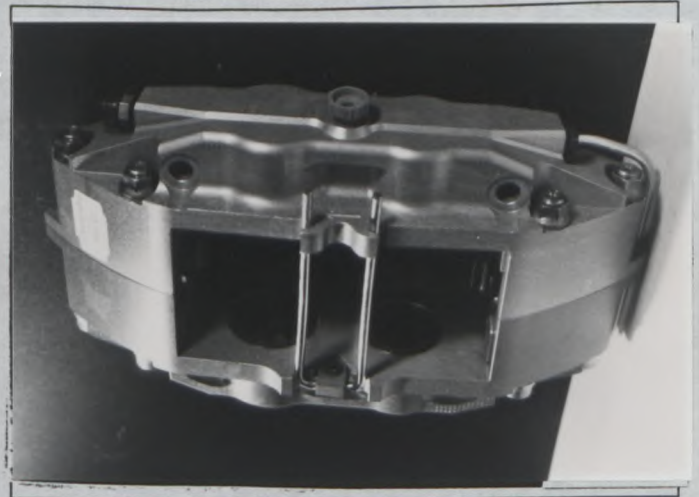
FRONT AND/OR REAR BRAKE CALIPER
